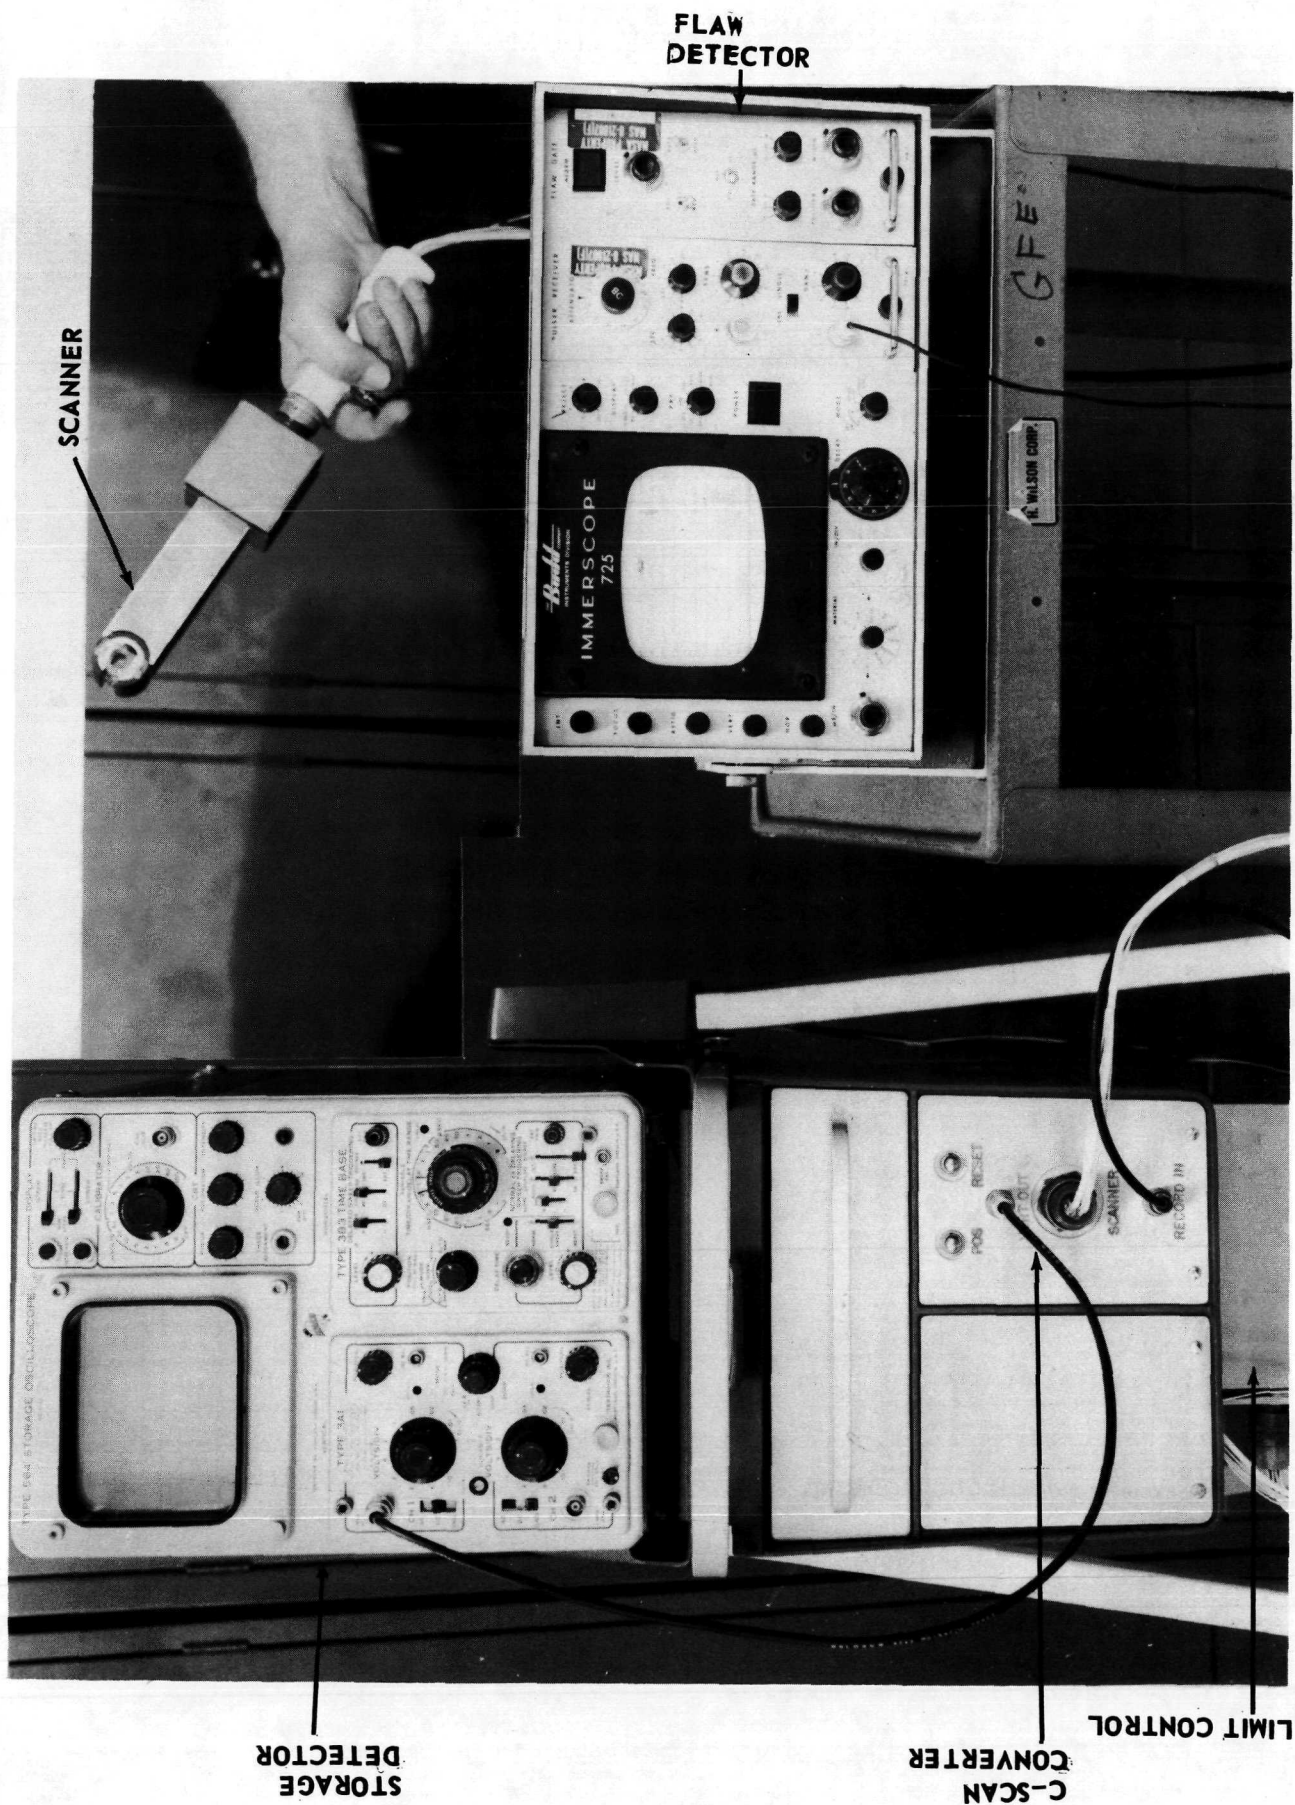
Ultrasonic Brazed Tube Inspection System Components.
